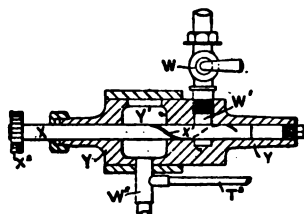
Roots' Oil Feeder for Petroleum or Explosive Engines (Longitudinal Section).
